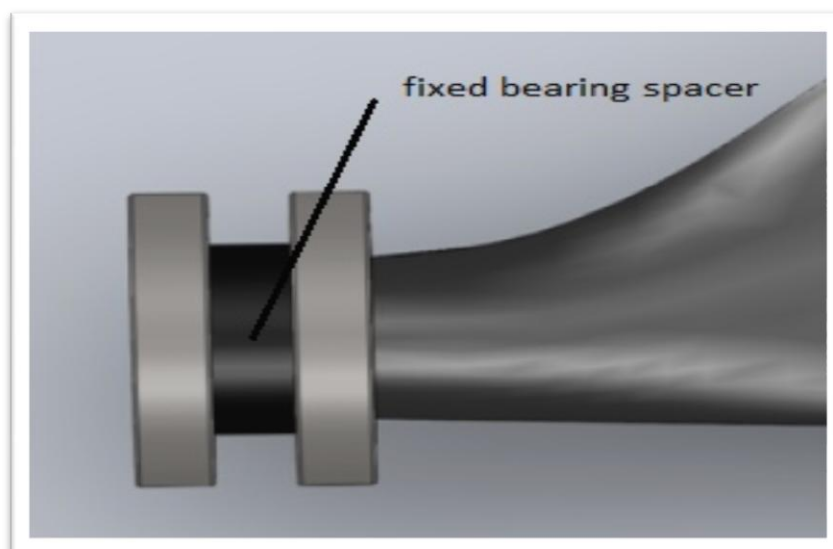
The fixed spacer between the root bearings to prevent axial movement of the blade in the bearings
